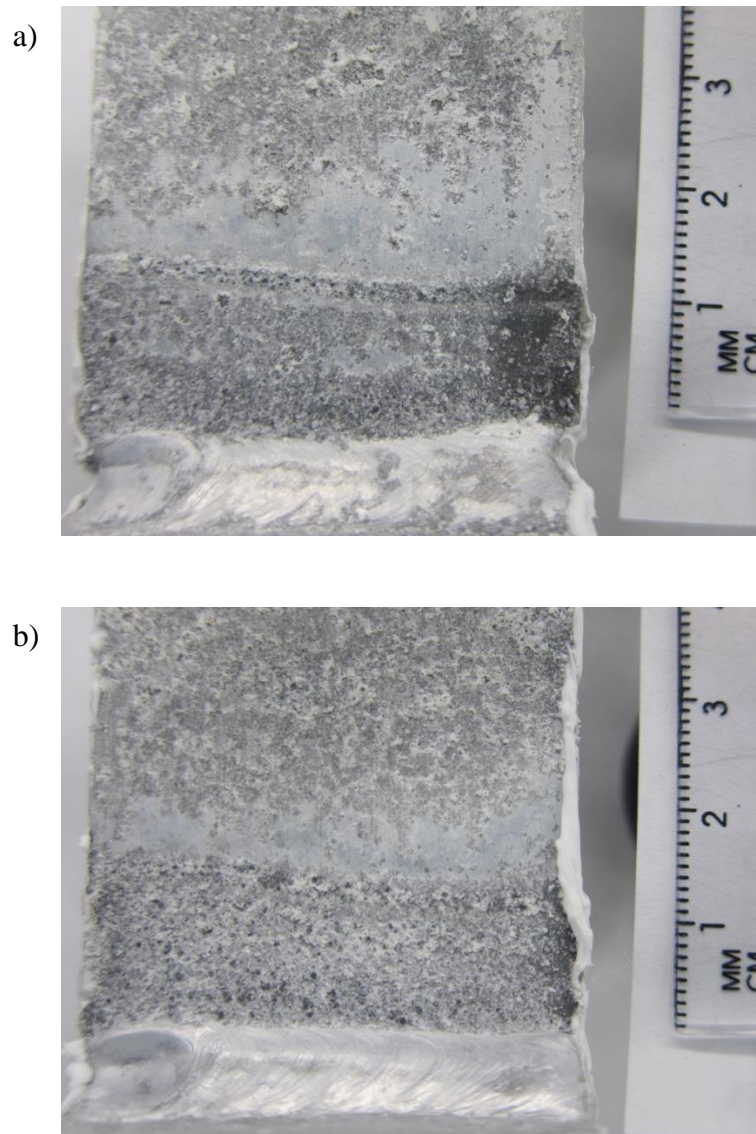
Close-up images of duplicate samples of T-joint welded configuration E1 (ER5356/AA7003/L) in the as-welded T6 condition.
